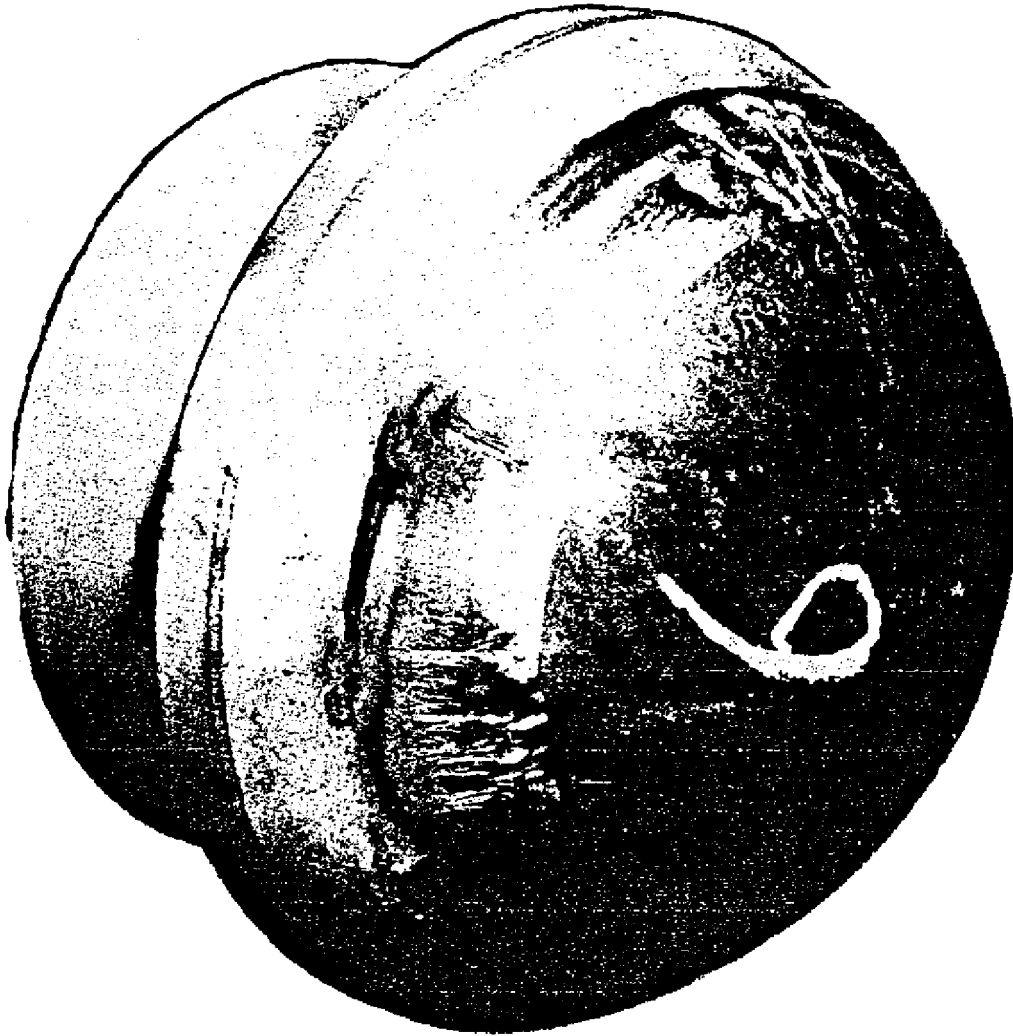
Steam Cutting of Poppet Valve at Stellite Insert
